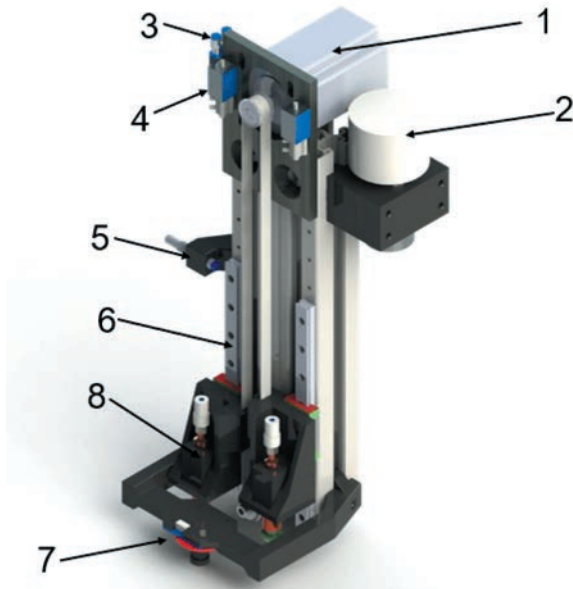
Design of drive system in Z-axis direction made in Solidworks: 1 – stepper motor; 2 – pump; 3 – pneumatic distributor; 4 – solenoid valve; 5 – inductive limit sensor; 6 – linear guide; 7 – top camera; 8 – head
